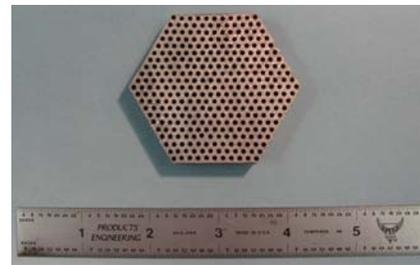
331 channel hexagonal demonstration fabricated by MSFC using the HIP process.
